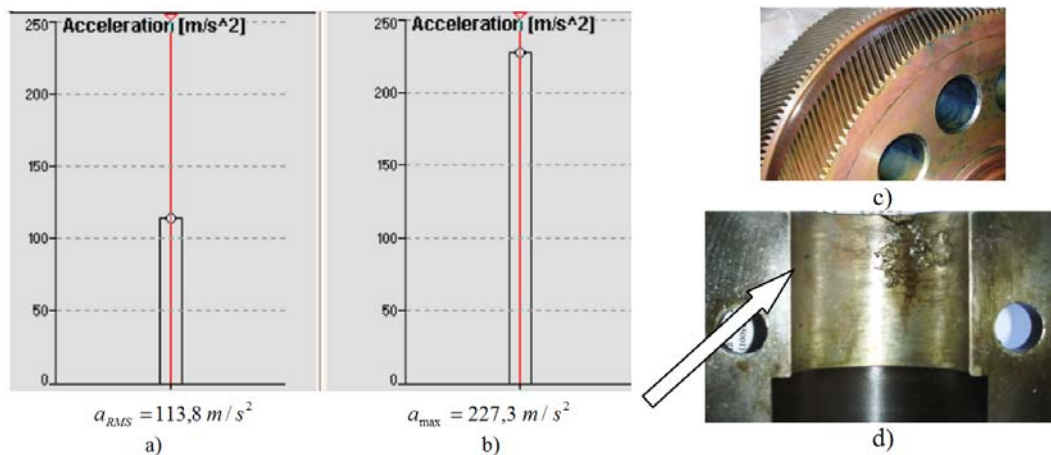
The 4th bearing housing vertical vibration acceleration  $a_{rms}$  (a) and  $a_{max}$  (b) values of 1250 kW turbounit ordinary helical gear train: gear  $z_2$  (c) and damaged journal bearing (d) caused transmission error in the gear mesh and generates high frequency vibration acceleration amplitude
